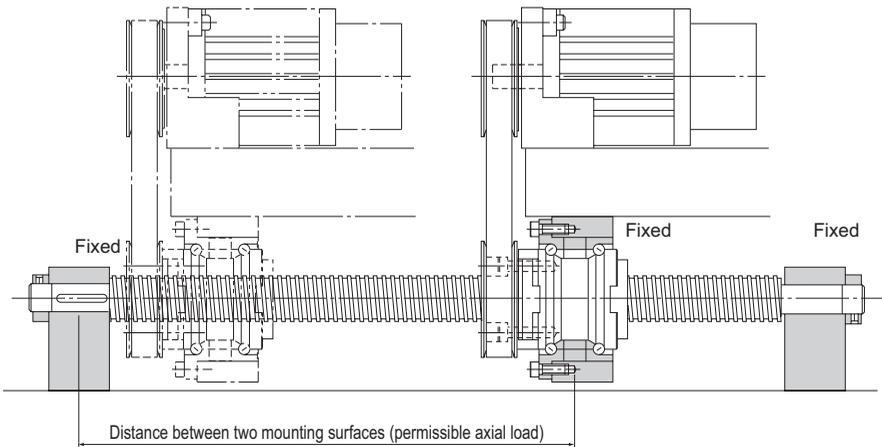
Screw Shaft Mounting Method for Rotary Nut Ball Screw: Fixed - Fixed
